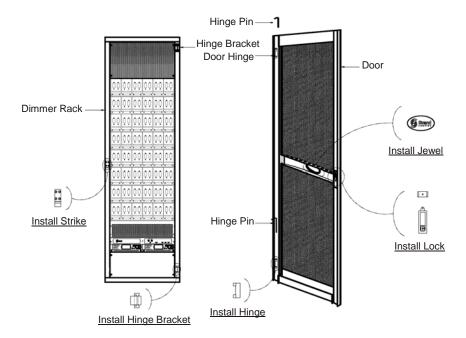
Installing EC21 Rack Hinge Plate and Door
